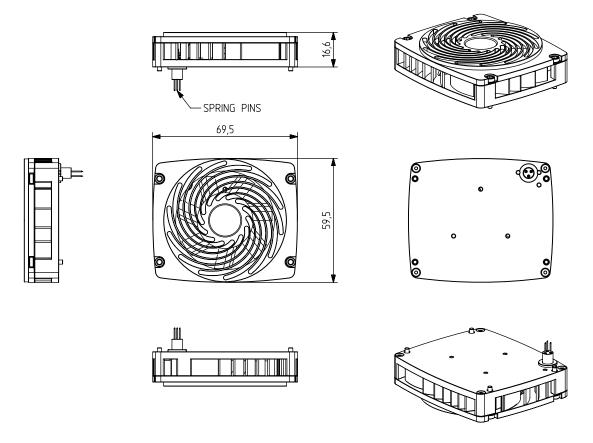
Dimensional drawing of CB-X8G3-FAN-COOLER
